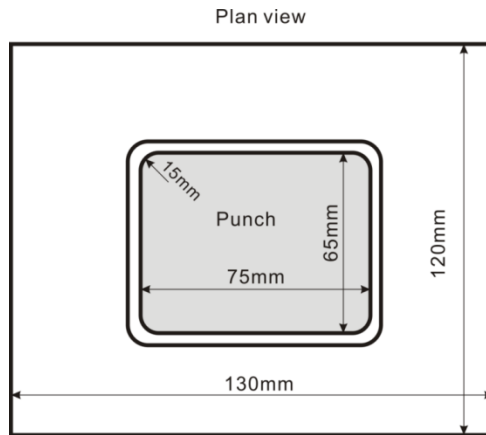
Scheme of the setup of rectangular drawing tests (RD)
